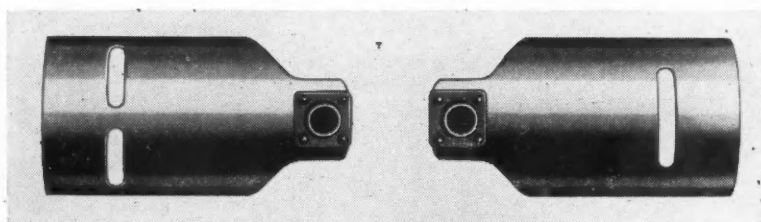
Intake valve with dual port (left) and exhaust valve with single port (right).
